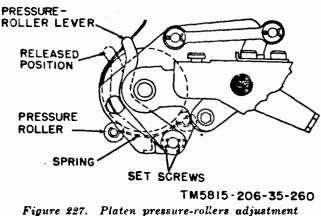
Platen pressure-rollers adjustment (TT-4A/TG).
